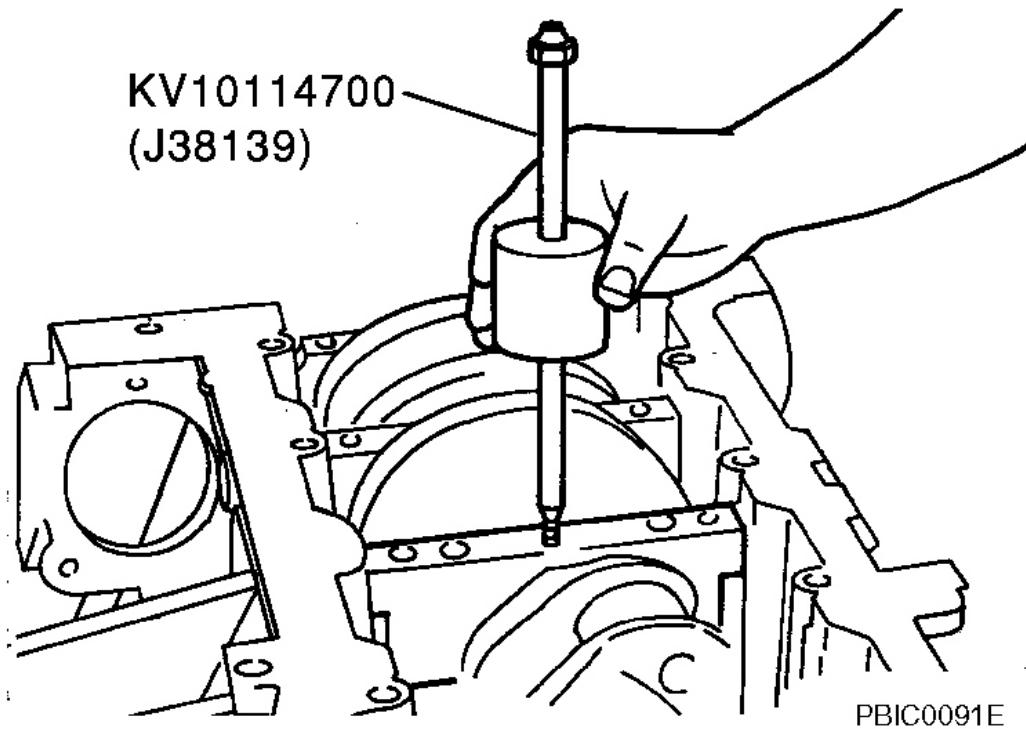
Removing Main Bearing Cap By Using Main Bearing Cap Remover
